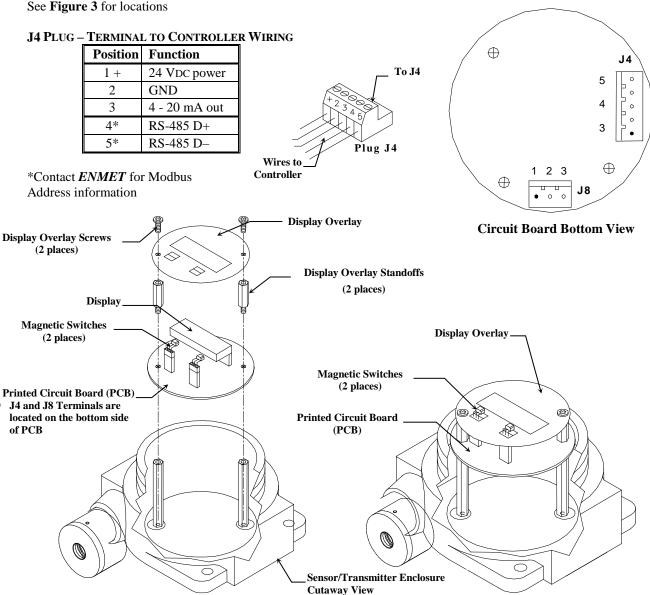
Terminal Positions EX-5175-EC Sensor/Transmitter
